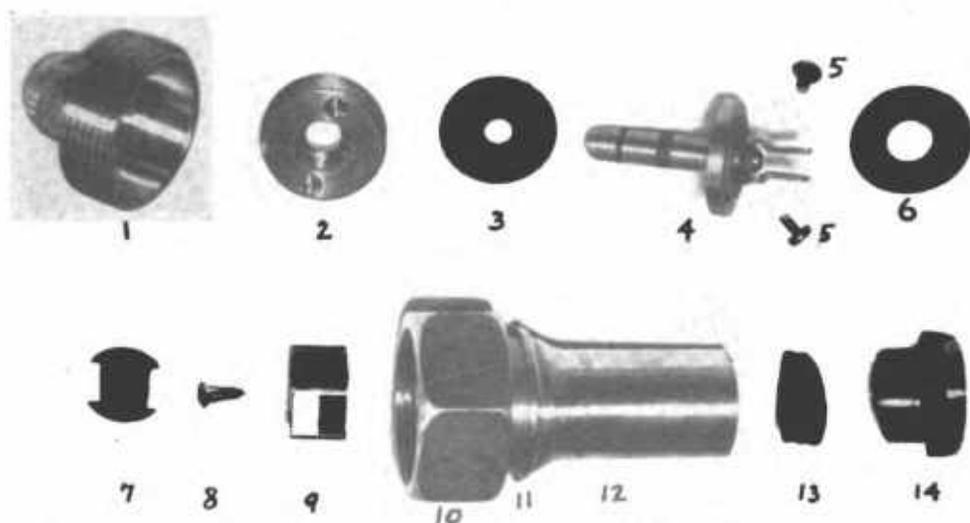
D.—Diving telephone coupling, male (jack plug housing)—Disassembled.
